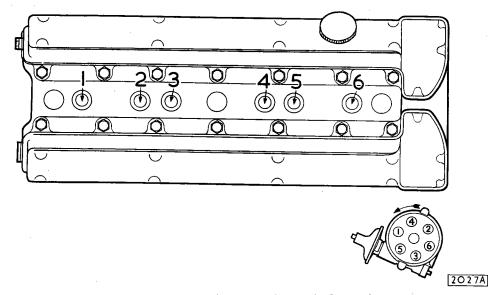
View of engine from above showing the firing order and cylinder numbers.
